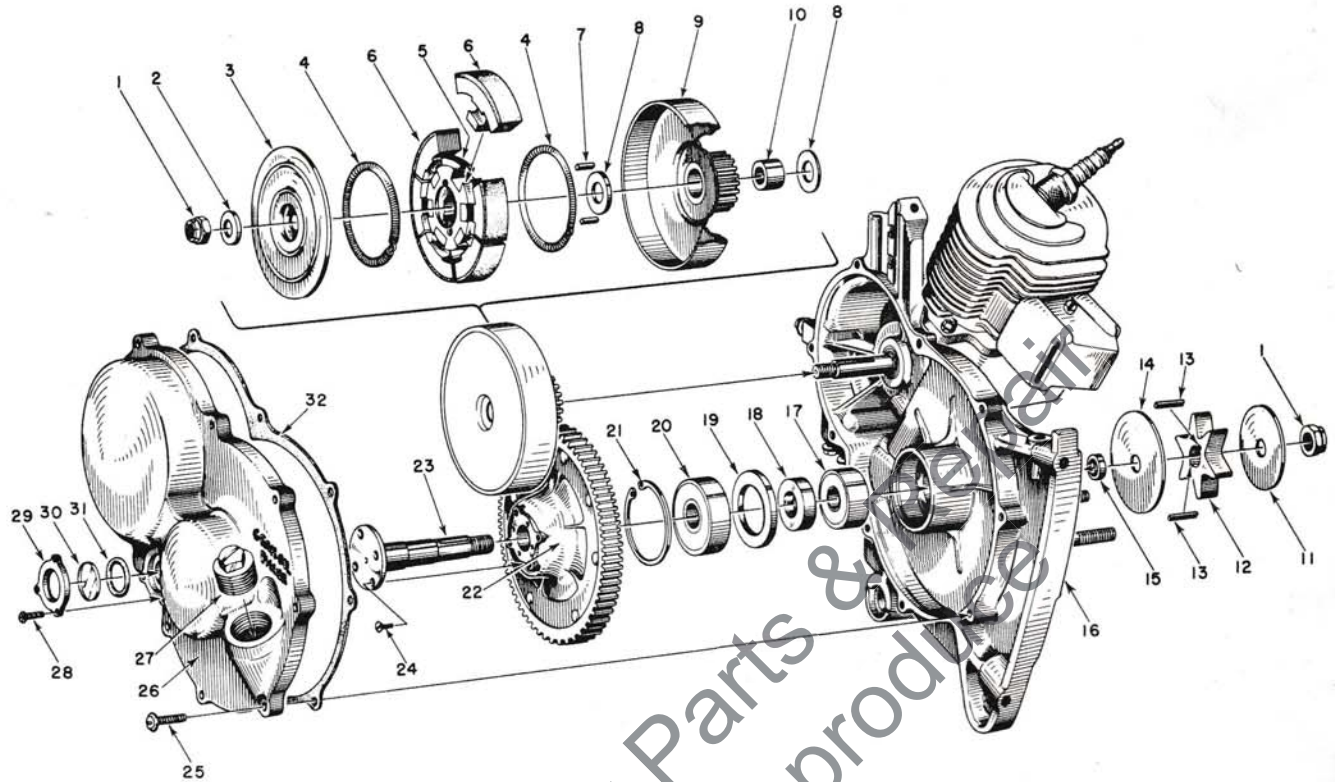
A — GEAR CASE AND SPROCKET PARTS
